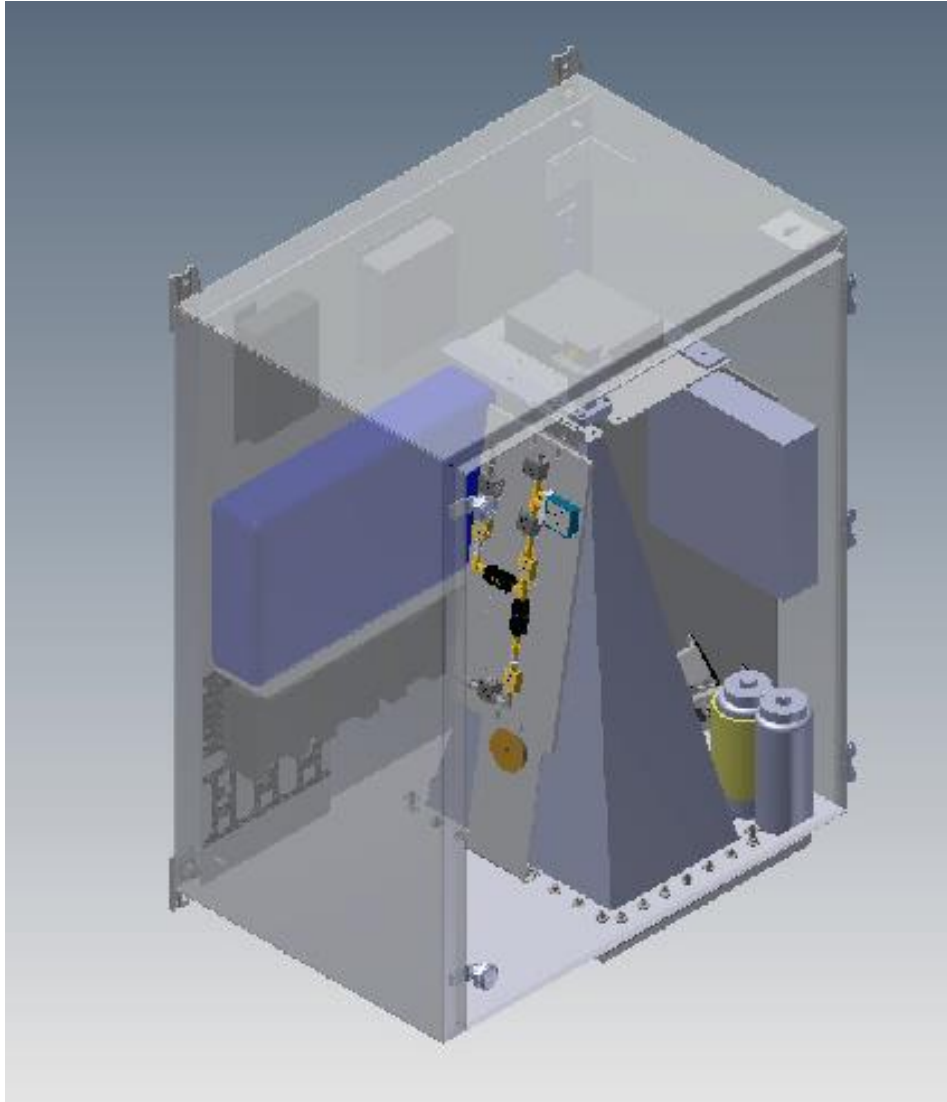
Assembly drawing of the WiBAR water-proof enclosure showing internal components placement
